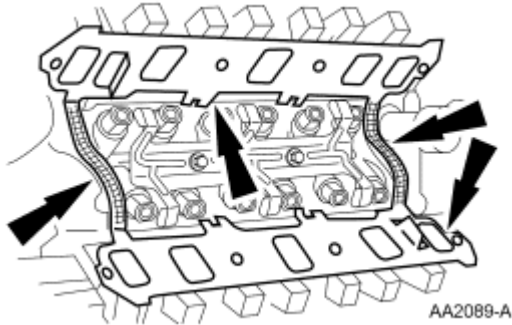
Locating Intake Manifold Gaskets & End Seals
